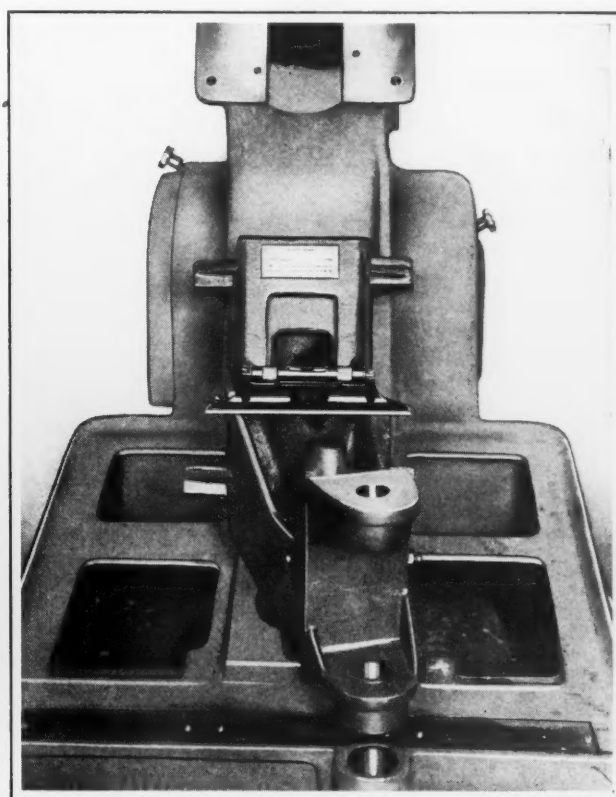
Same Fixture, with Level Shown in the Second Position, Insuring Accurate Leveling of the Bed
